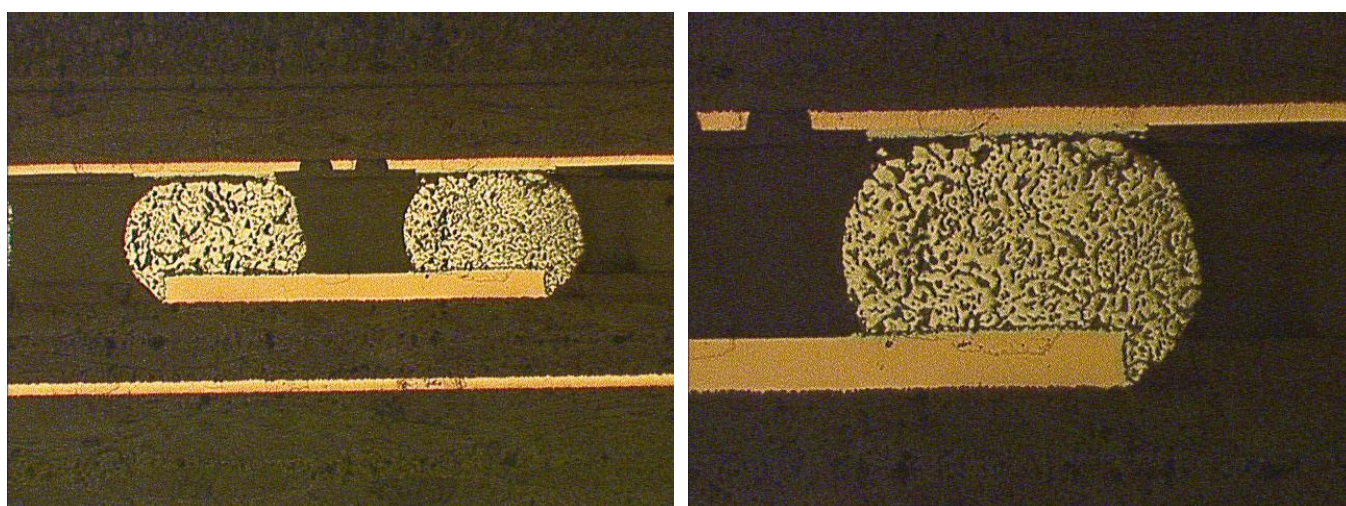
Reworked CSP-100 Solder Joints, Board 128, Component U19, Initially SnPb/SnPb, 1 rework Flux Only/SnPb, Failed @ 3012 Cycles
